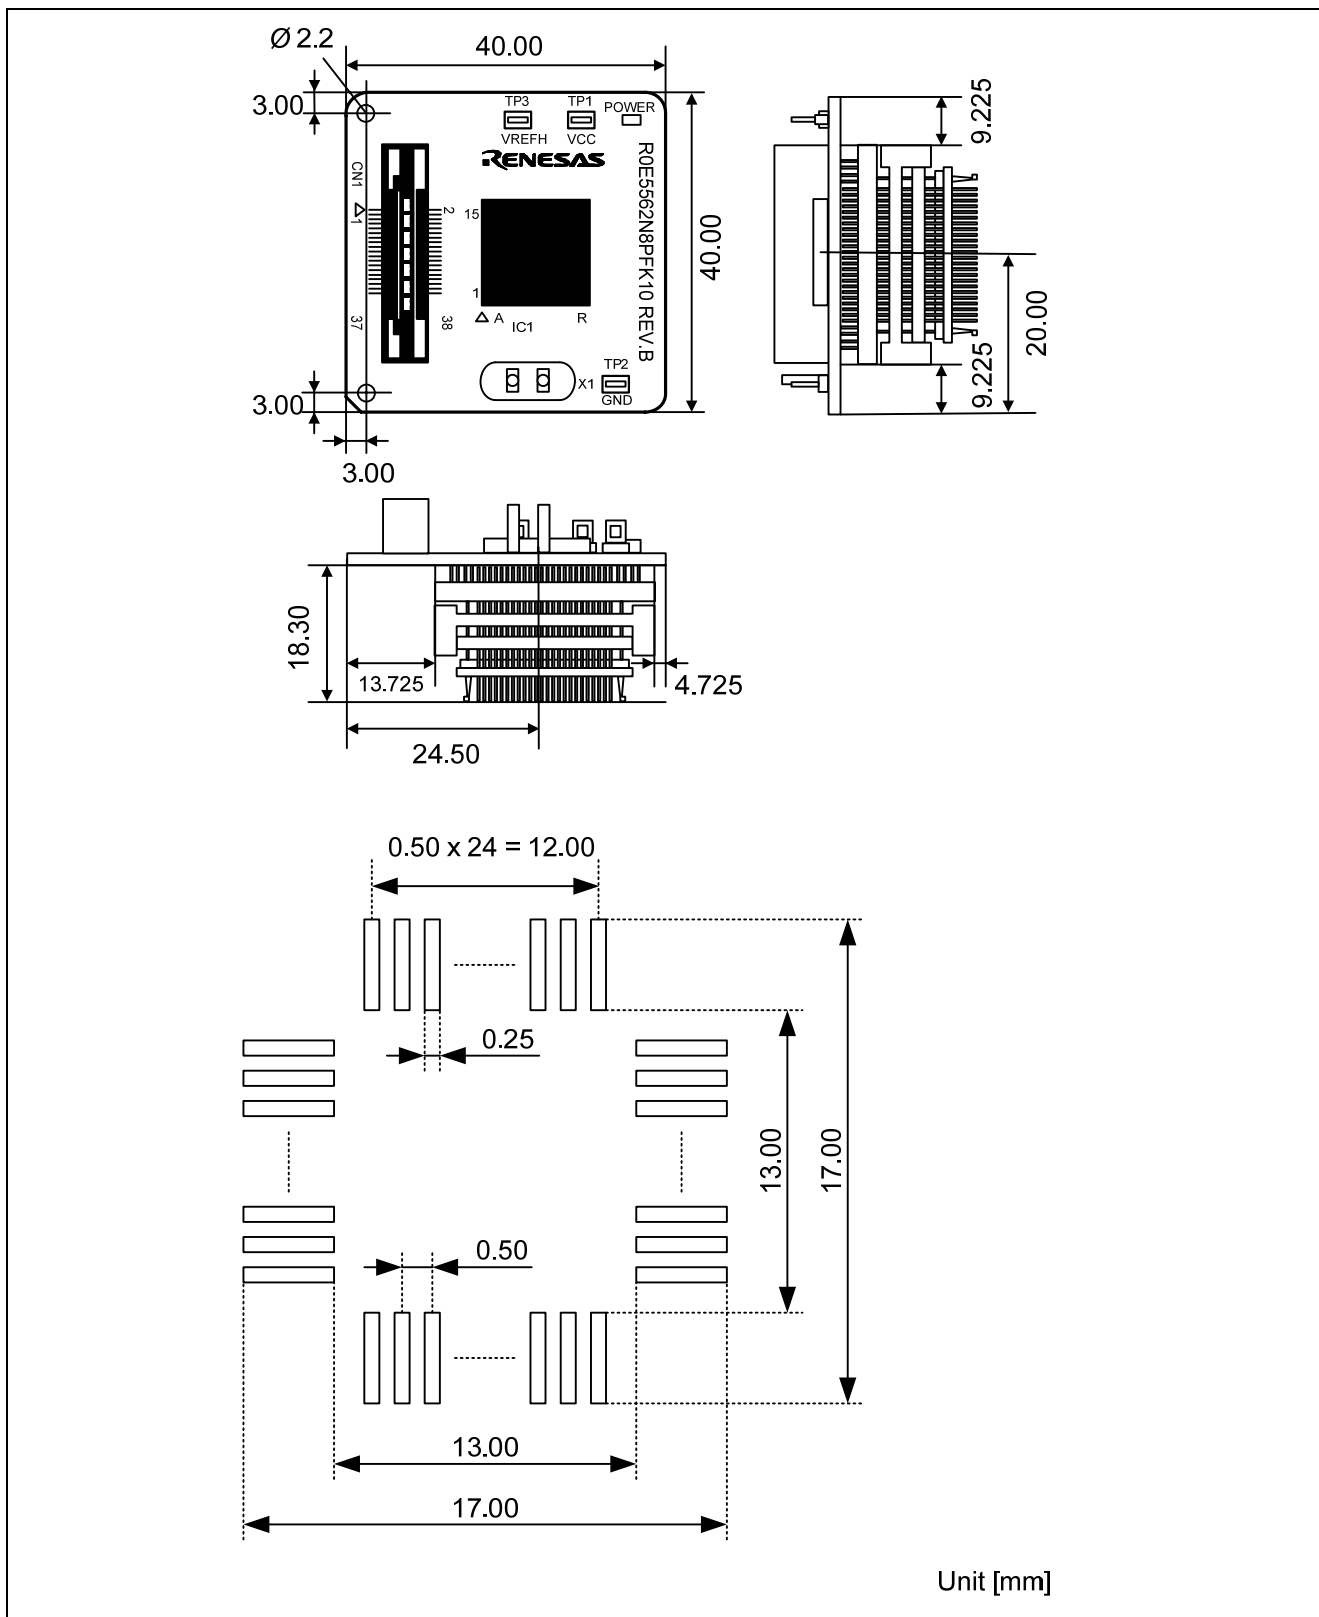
Reference Pad Pattern and Dimensions of the Debugging MCU Board (R0E5562N8PFK10)
